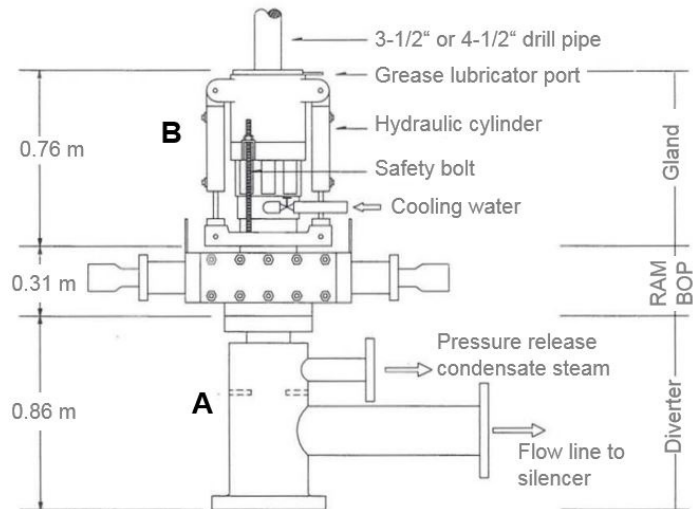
Wellhead configuration prototype used in Iceland (adapted from Molina, 1995)
